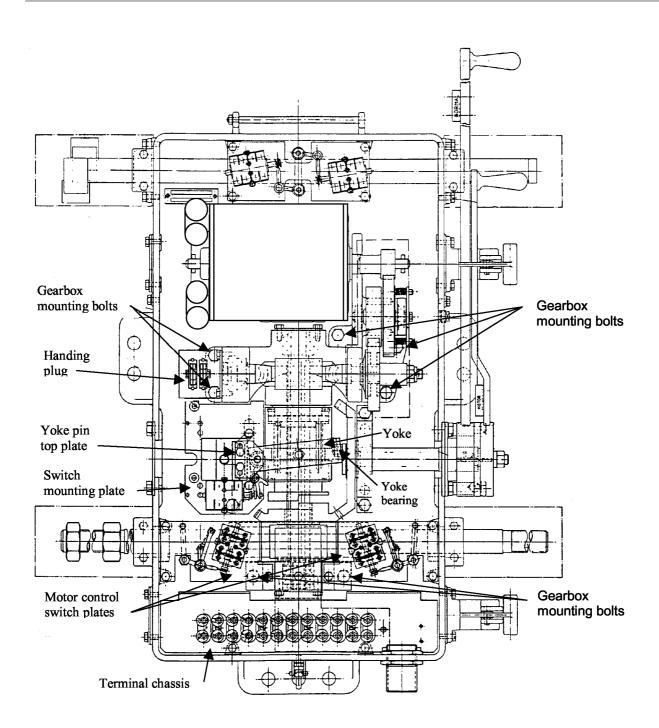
TD84M machine (Trailable with hand throw lever)
